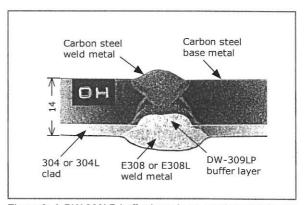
A DW-309LP buffer layer in an overhead joint weld of stainless-clad steel.
